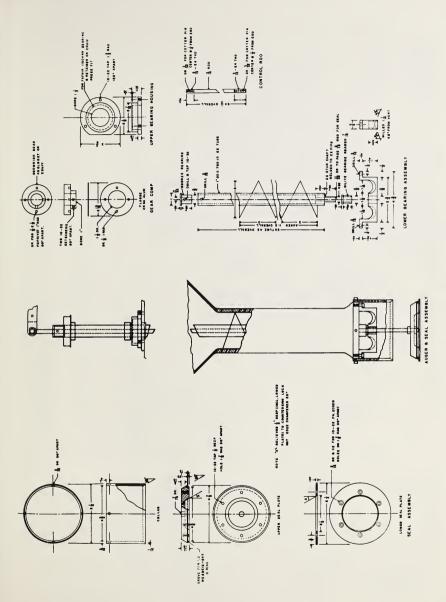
Auger dispenser drawing No. 2, auger seal and assembly.
